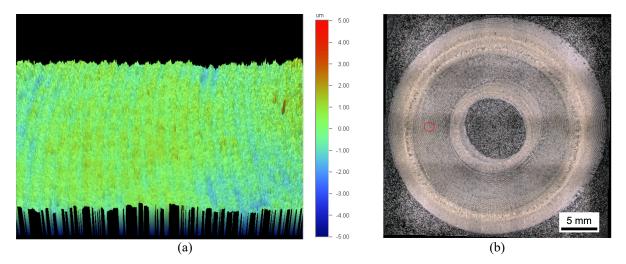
(a) 3D surface profilometer measurements (scan width approximately 3 mm) show the surface topography (μ m) of the i-Kote coating after ten 6061 unlubricated aluminum room temperature forgings to 425 kN at the middle of the forging zone. (b) Overall forging area where red circle shows the location of the profilometry scan.
